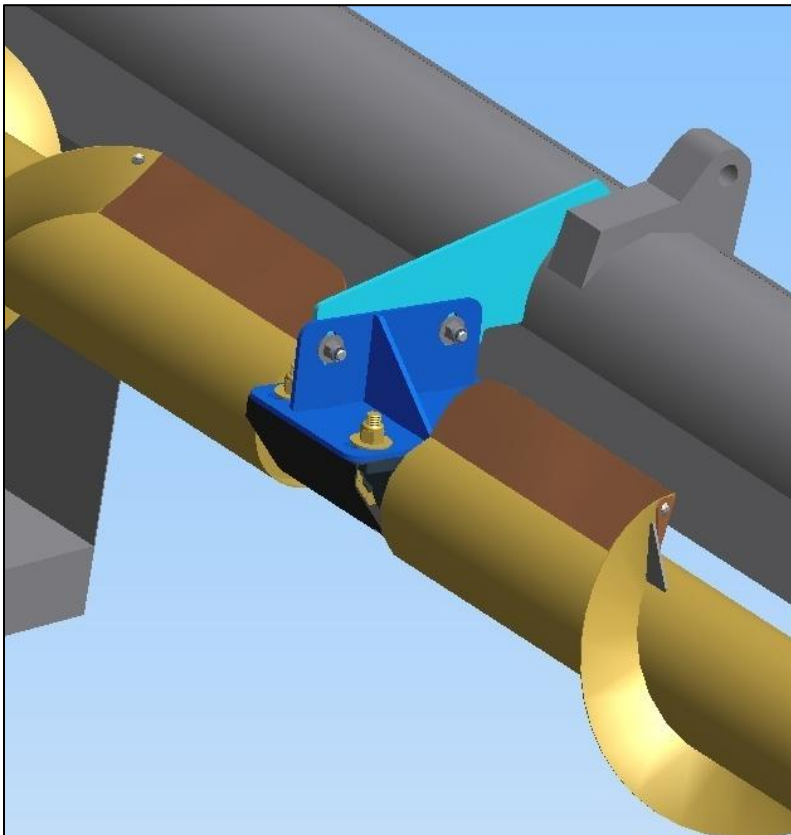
CENTER AUGER MOUNT AND WELD ON HANGER (LIGHT BLUE) WITH PLASTIC COVER FOR 36 FOOT KIT 405878
